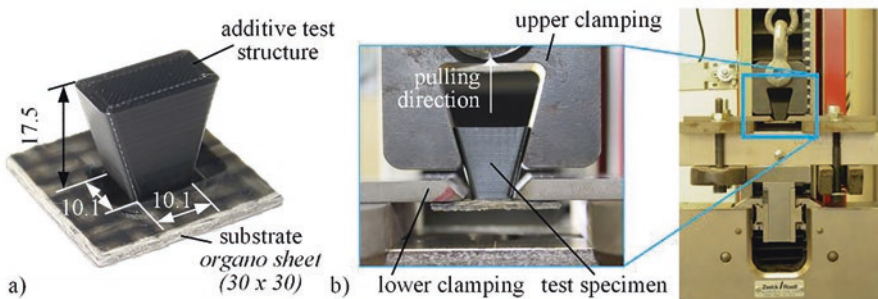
a) Hybrid-test specimen; b) setup for tensile test
